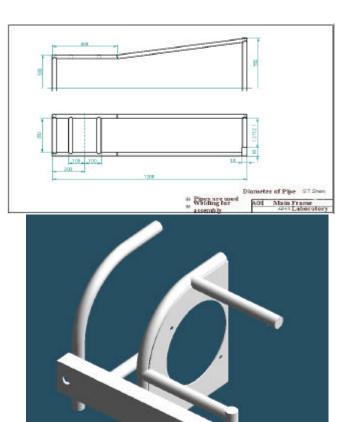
3D-CAD Drawing of Motor Mount Frame Figure 6 2D Drawing of Main Frame
